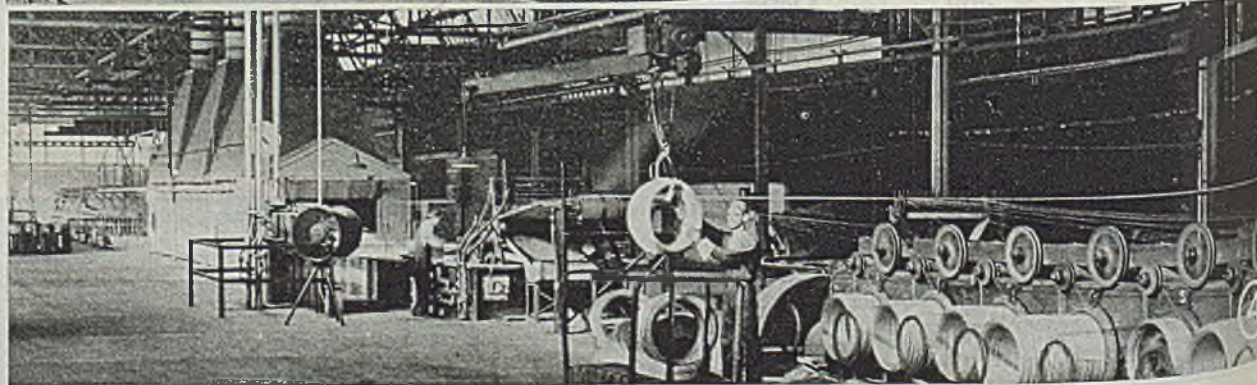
Coarse wire galvanizing line. Takeup blocks at right
